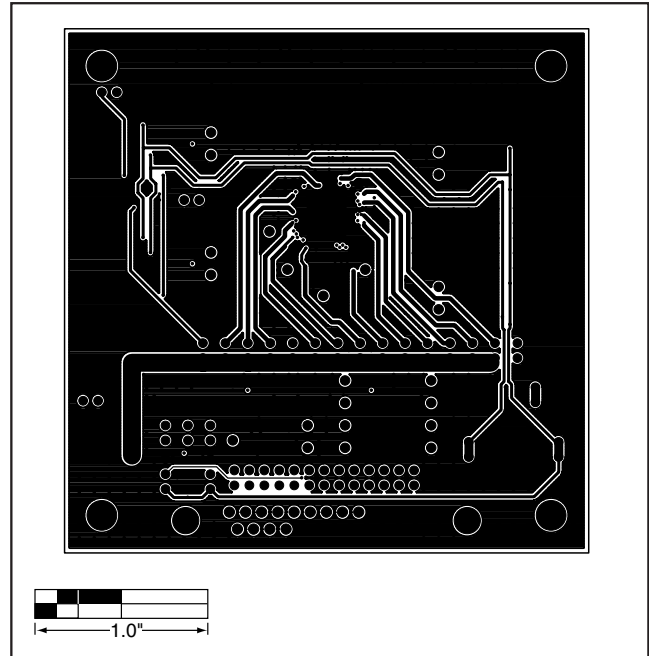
MAX2828/MAX2829 EV Kit PC Board Layout—Inner Layer 3
